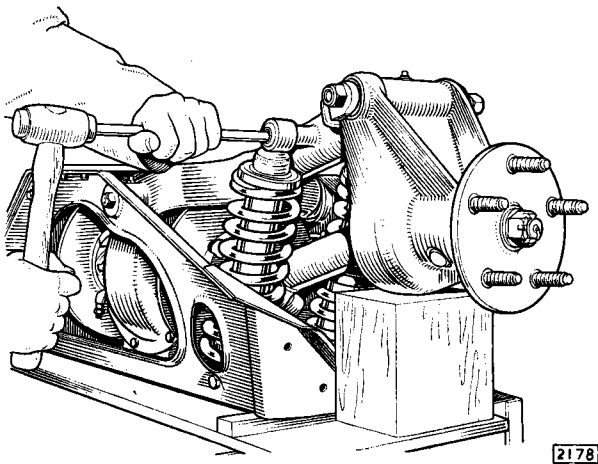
Drifting out the hydraulic damper mounting pin
